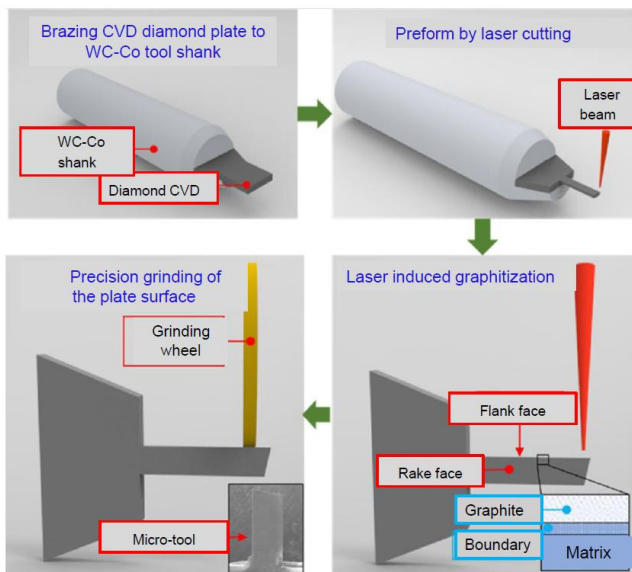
Fabrication process of CVD CD coated micro-milling tools [19].
